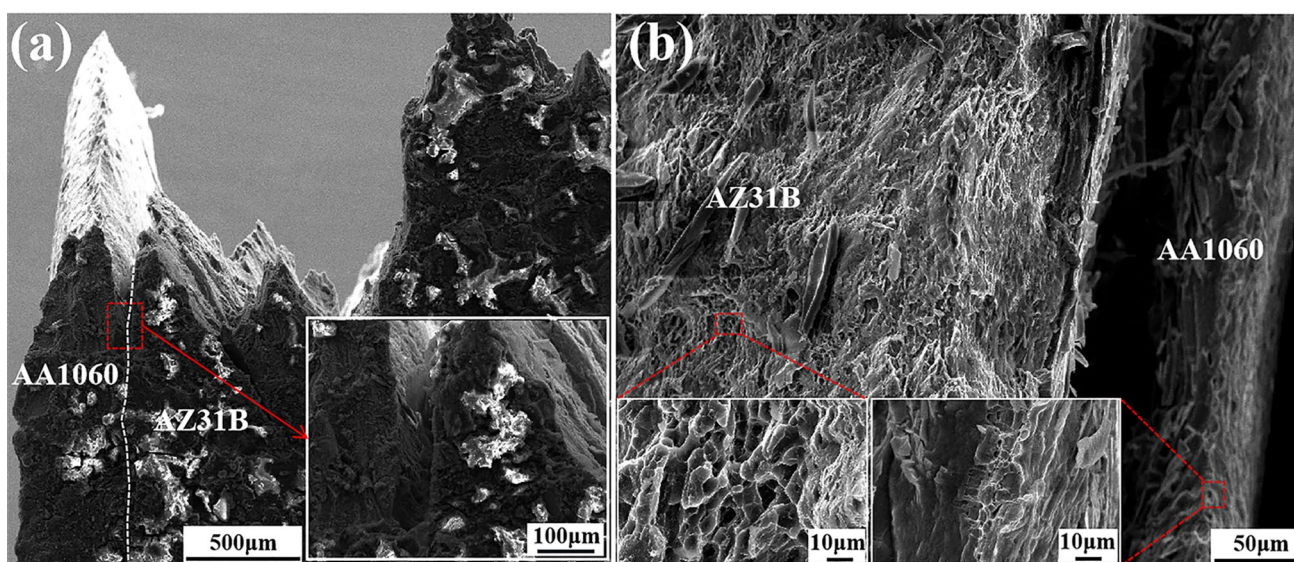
Fracture morphology: a interface fracture morphology (RD-ND); b interface fracture morphology (TD-ND)
